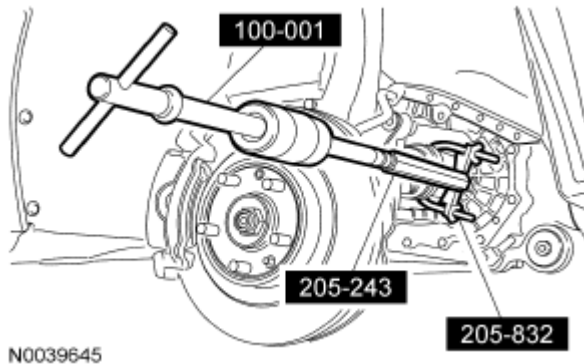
Identifying Special Tools (100-001, 205-243 And 205-832)
